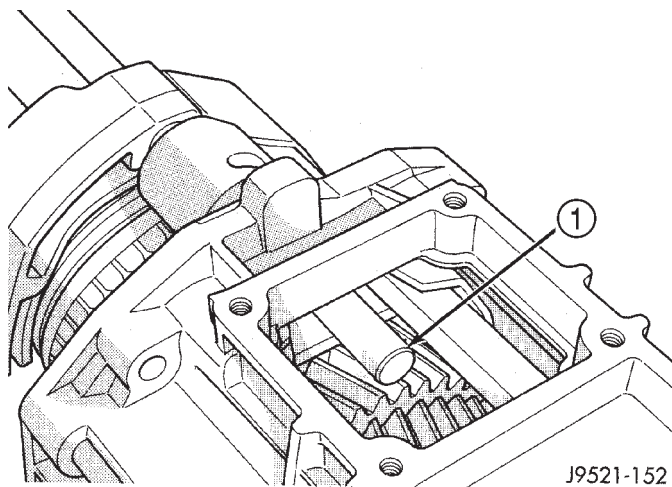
Inserting Shaft Into Lever Opening In Housing
